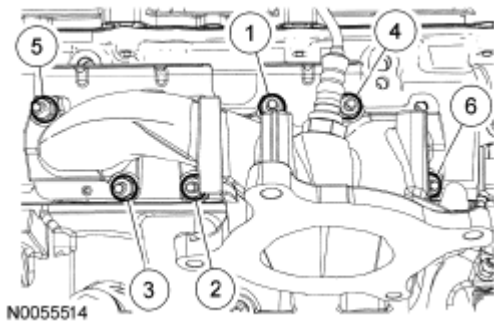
Identifying LH Exhaust Manifold Nut Tightening Sequence
